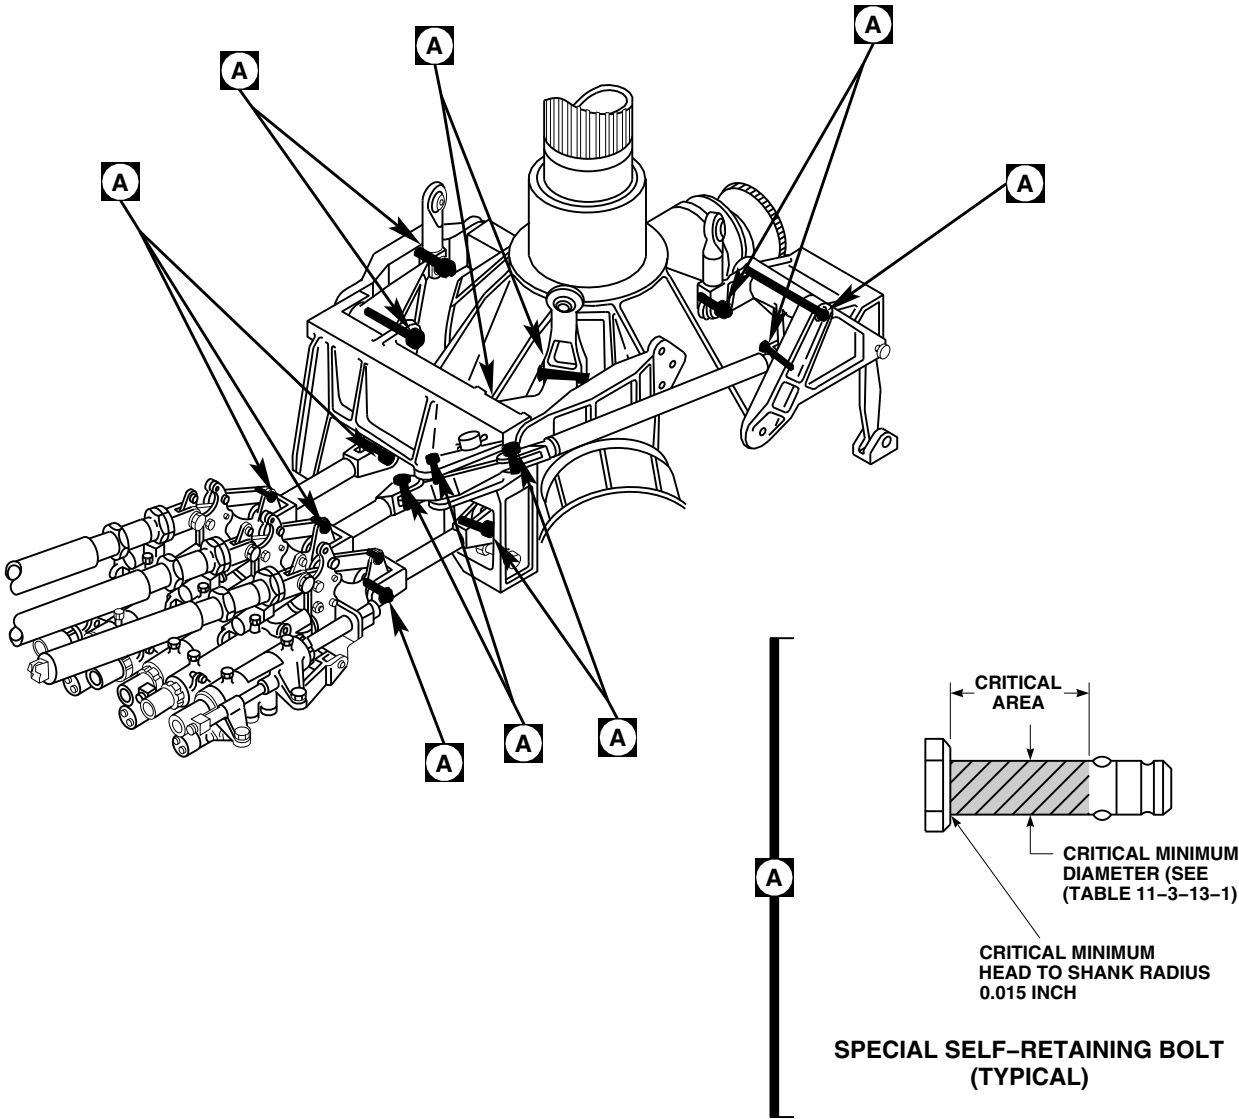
INSPECT MAIN ROTOR CONTROL SELF-RETAINING BOLTS
